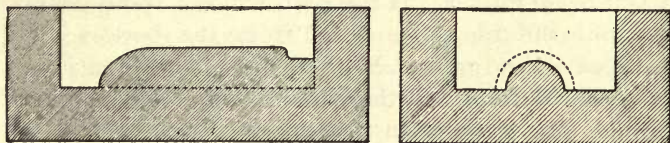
CORE BOX, TENSILE TEST PATTERN.
